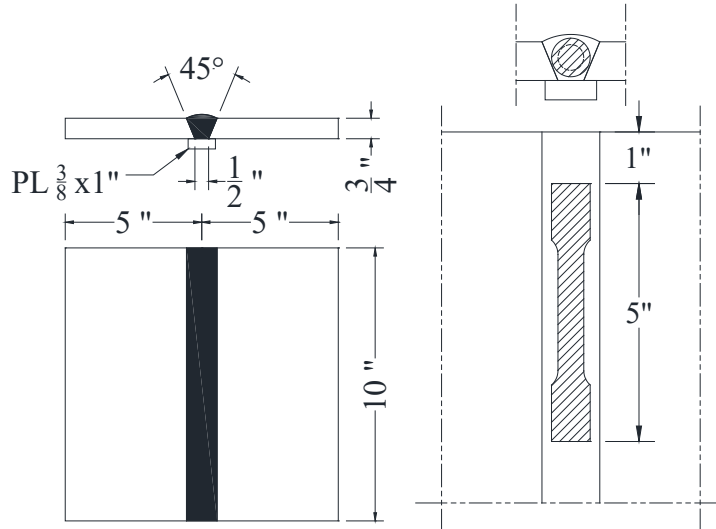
Groove-welded test plates for all-weld-metal tension tests.
